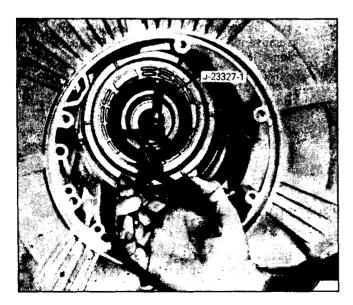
F-54 Removing Reverse Piston Spring Retainer Snap Rino
